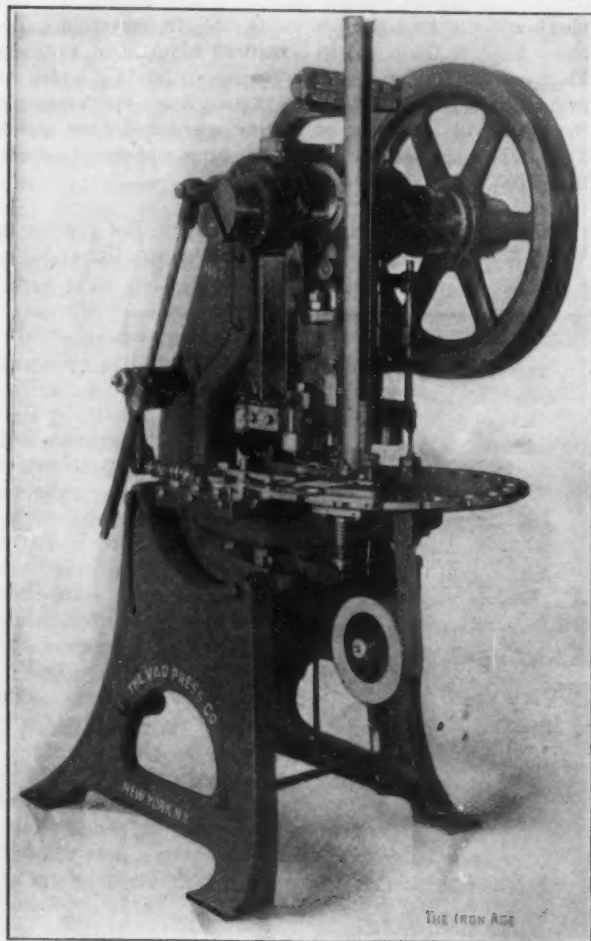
A V. & O. Incluable Press Specially Equipped to Make Bottle Caps.
